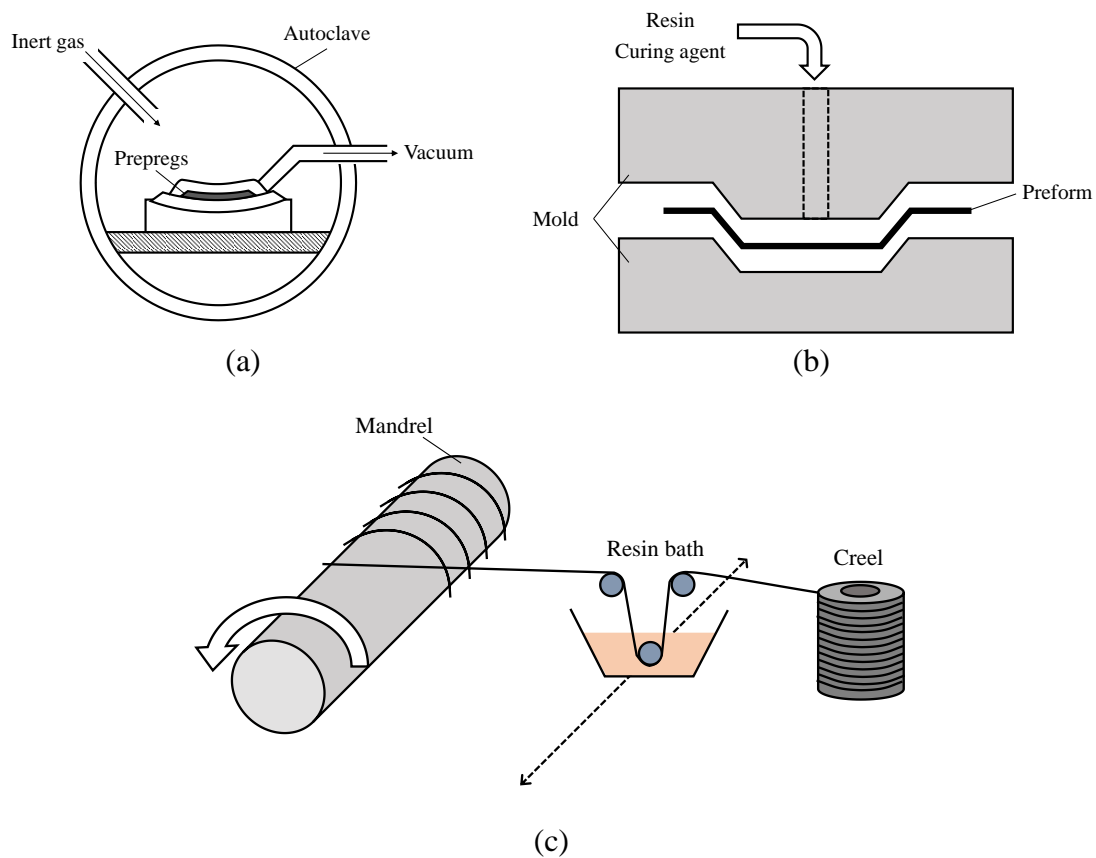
Methods of molding CFRP: (a) autoclave molding, (b) resin transfer molding (RTM), (c) filament winding (FW).
